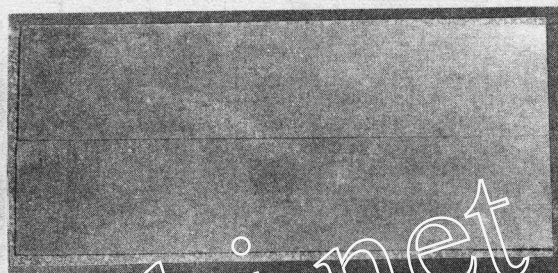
No deformation occurred 1 \times 330 \times 800 mm galvanized steel sheet after laser welding
